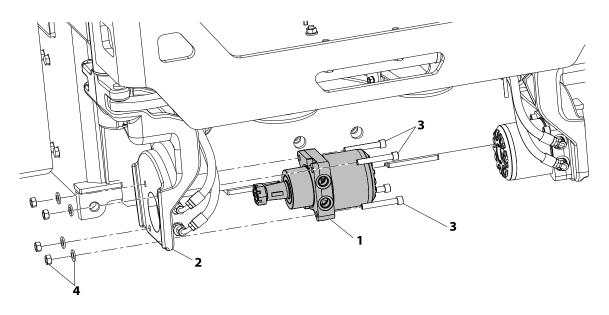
Drive Motor - Installation (Right Motor shown, Left Motor the same, flip motor over, keeping ports facing forward.)
